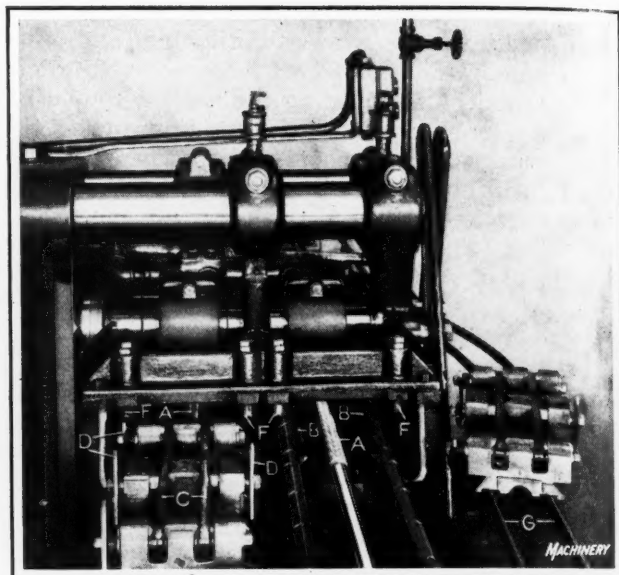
View of Machine, Showing the Two Lead-screws for Feeding the Work Past the Cutters
